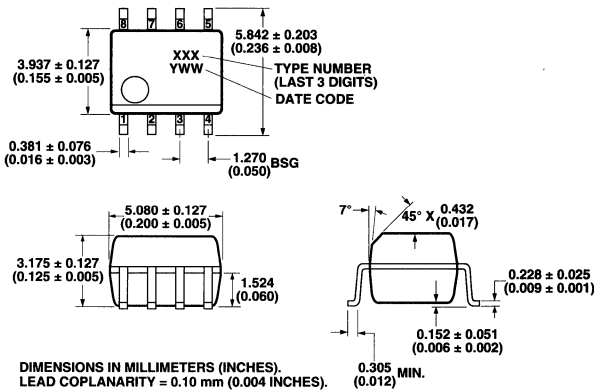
HCPL-0466 Outline Drawing (8-Pin Small Outline Package).
